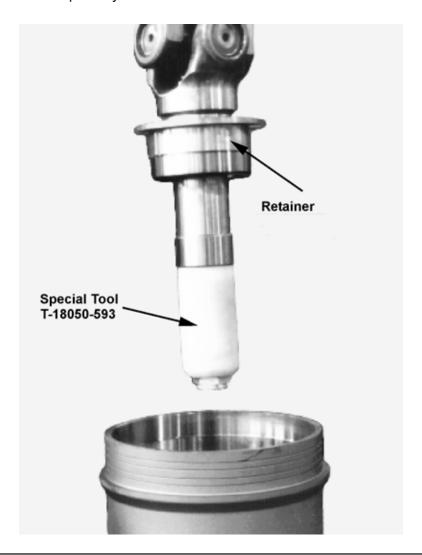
Installing Input Shaft and U-Joint into Socket (bolted flanged retainer shown but not used in all drives)
